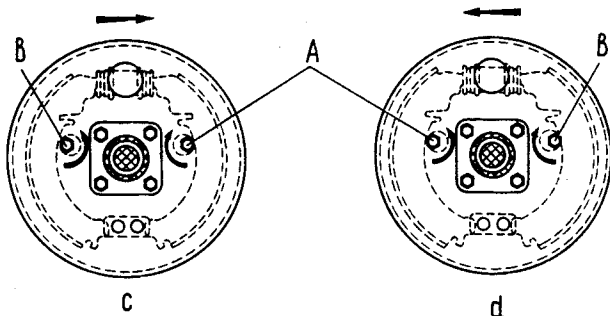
Shoe-to-Drum Clearance Adjustment: A - front shoe adjusting eccentrics; B - rear shoe adjusting eccentrics. Arrows above show the direction of car travel; C - L.H. wheel; d - R.H. wheel
